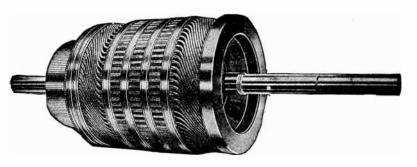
Holzer Cabot armature; rear view showing back head and coil guard. The construction of core and winding is described in fig. 367. The shaft is of crucible steel ground to gauge. The commutator segments are of drop forged copper in the smaller and hard-drawn copper in the larger sizes. The insulating material between the segments is mica. On the larger sizes, the commutator shell is fitted with a thread and mounted on a spider. This construction provides openings between the commutator and shaft for ventilation.
